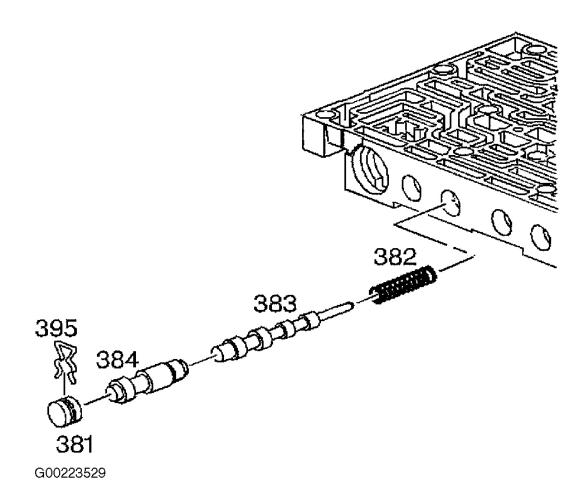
Removing/Installing Regulator Apply Valve Assembly Courtesy of GENERAL MOTORS CORP.
